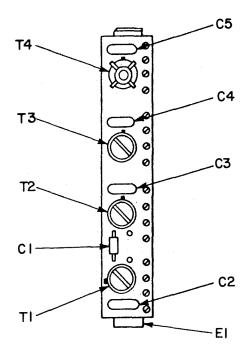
21 MHz Subassembly A2A4A11, Component Locations
